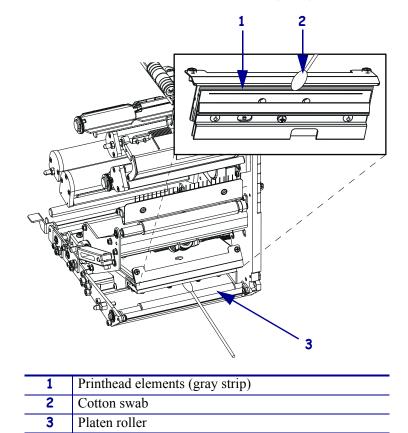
• Printhead and Platen Roller Cleaning (Right-Hand Unit Shown)
